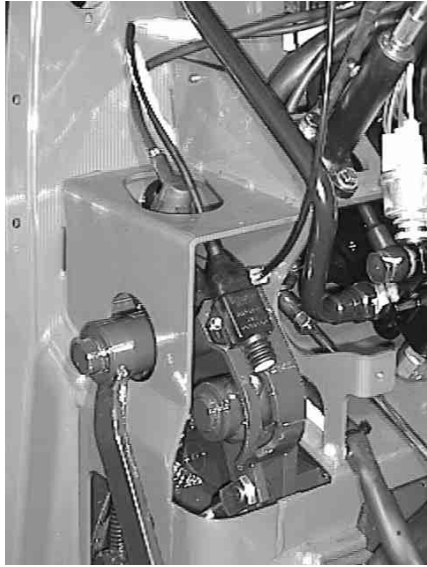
shows the correct positions of the clutch linkages in the clutch bowl: the one used to operate the PTO clutch and the one used to operate the main clutch.
